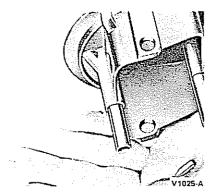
REMOVING ACCELERATING PUMP DISCHARGE NEEDLE
